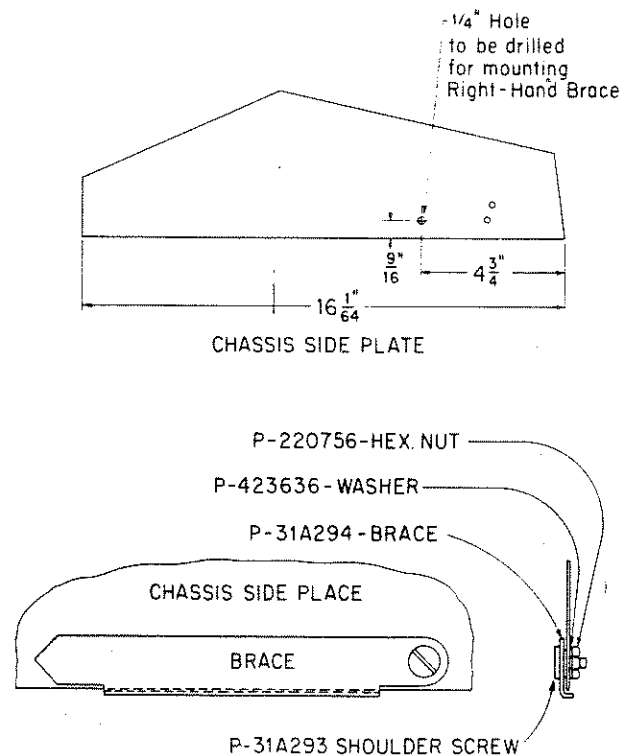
Installation and Assembly of Supplementary Keyshelf Brace for 507-type PBX Not Provided with Two Keyshelf Braces
